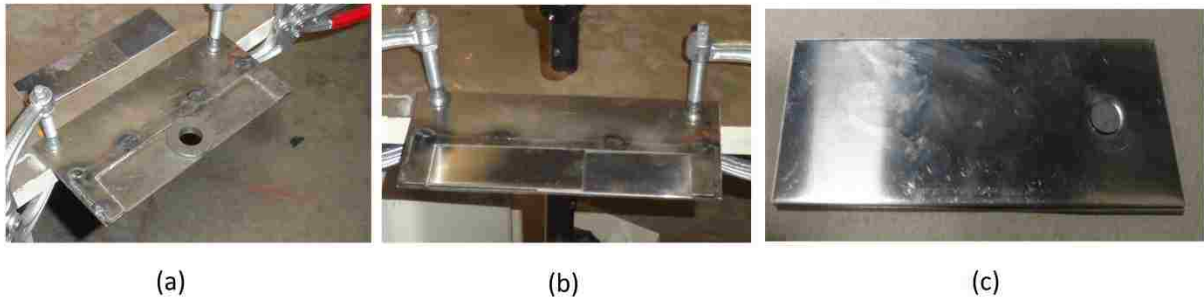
Sample preparation; (a) fixture for coach and lap joint. (b) lap joint (c) coach joint.
